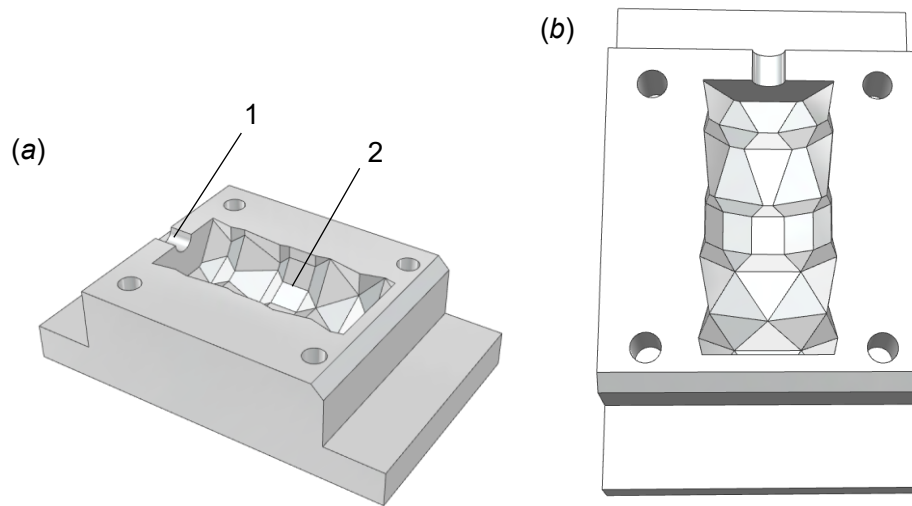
Mold structure of Origami-based tube. (a) 3D view (1. Air hole, 2. Cavity.), (b) top view.
